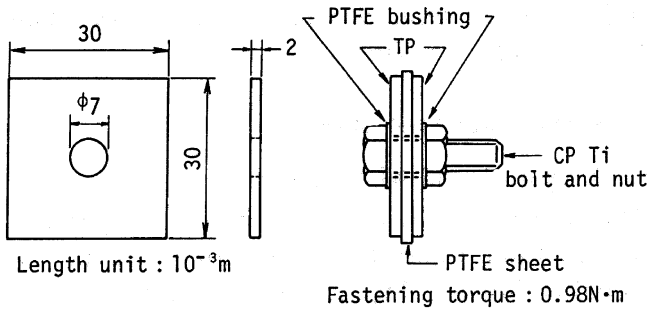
Drawing of a crevice corrosion test specimen "stack" (courtesy J. A. Hall)
